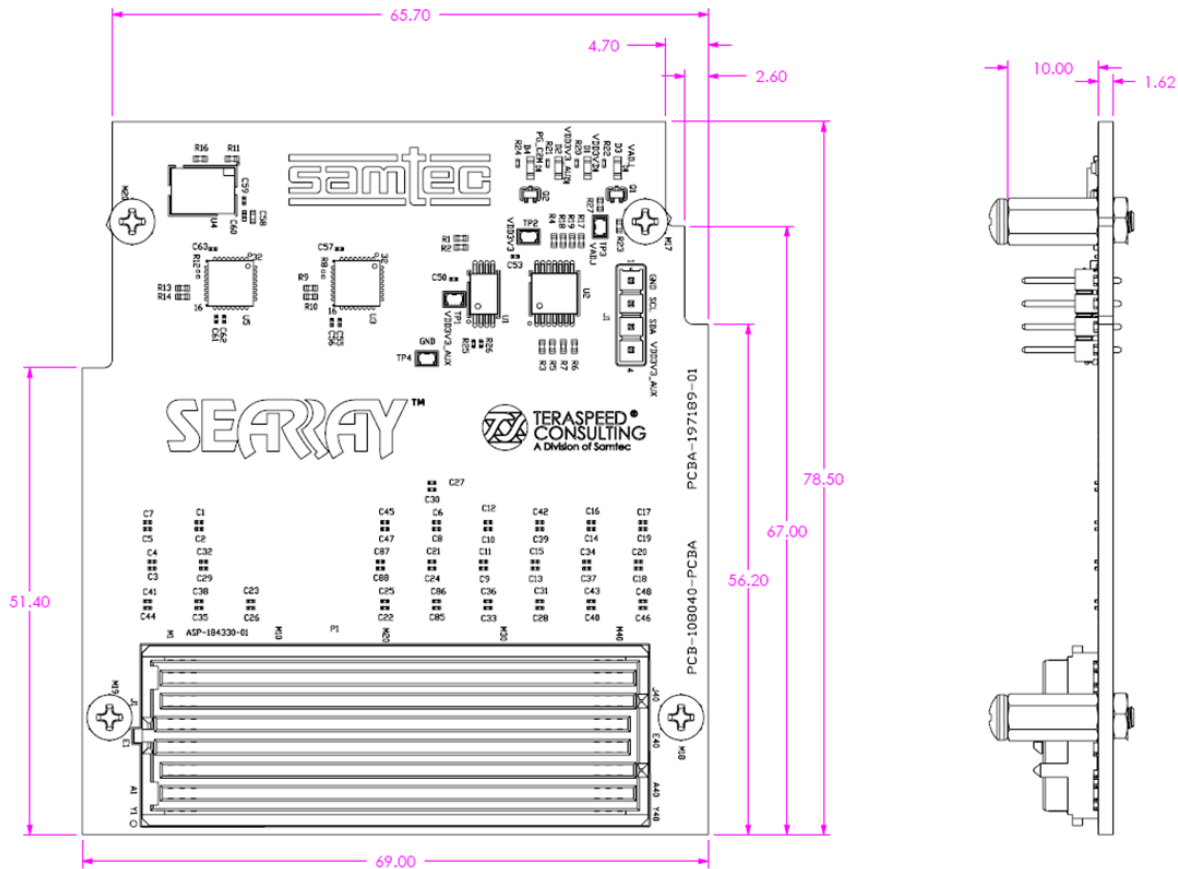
Mechanical Dimensions for HSPC Loopback Card
